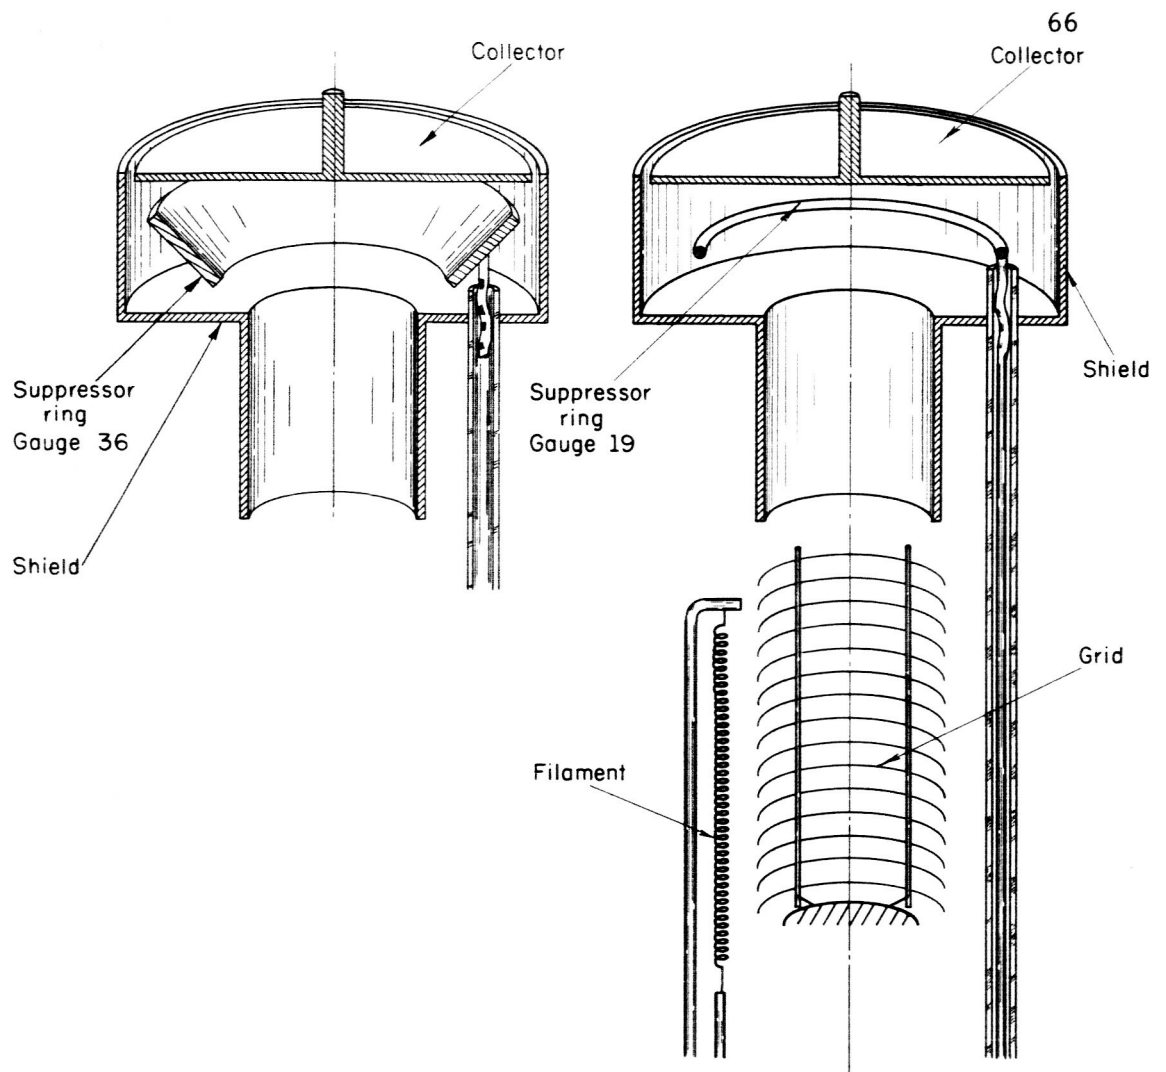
Cutaway Drawing of Suppressor Gauge Showing Change in Suppressor Geometry.
